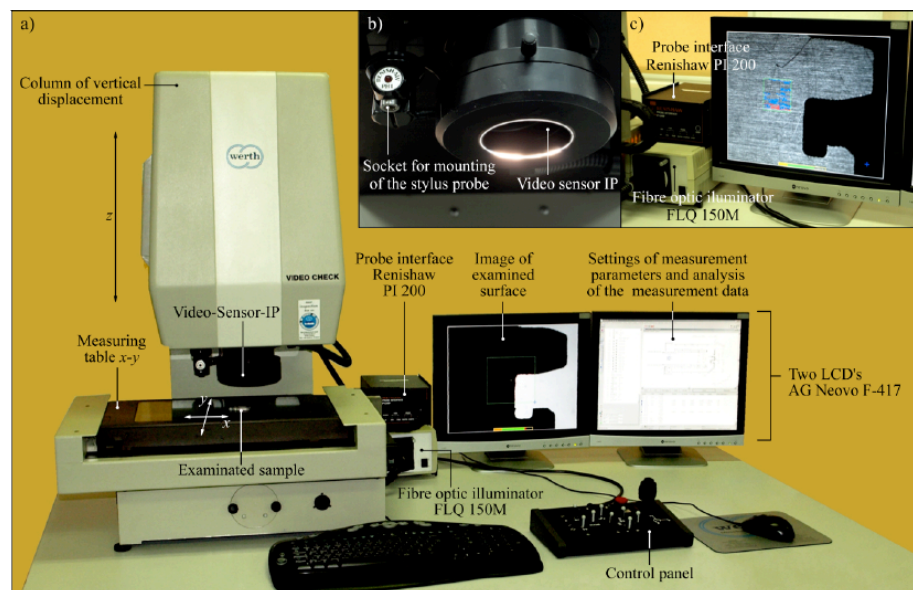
The general view of bench-type multisensor coordinate measuring machine Video-Check® -IP 250 produced by Werth Messtechnik GmbH (Germany): a) general view of the measuring machine, b) detail of multisensory system, c) detailed view of the external illuminating system and LCD screen during the measurement.
